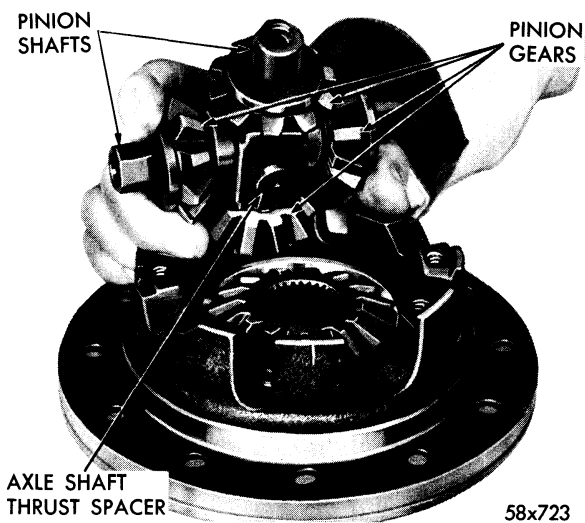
Removing or Installing Pinion Shafts and Pinion Gears
